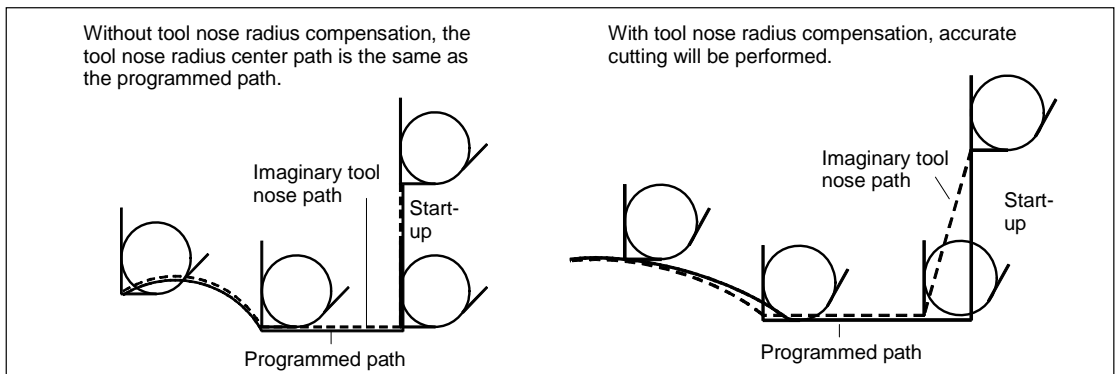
(d) Tool path when programming using the imaginary tool nose
